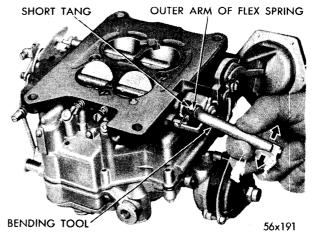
Bending Short Tang on Throttle Shaft Dog (Step 4-A)
